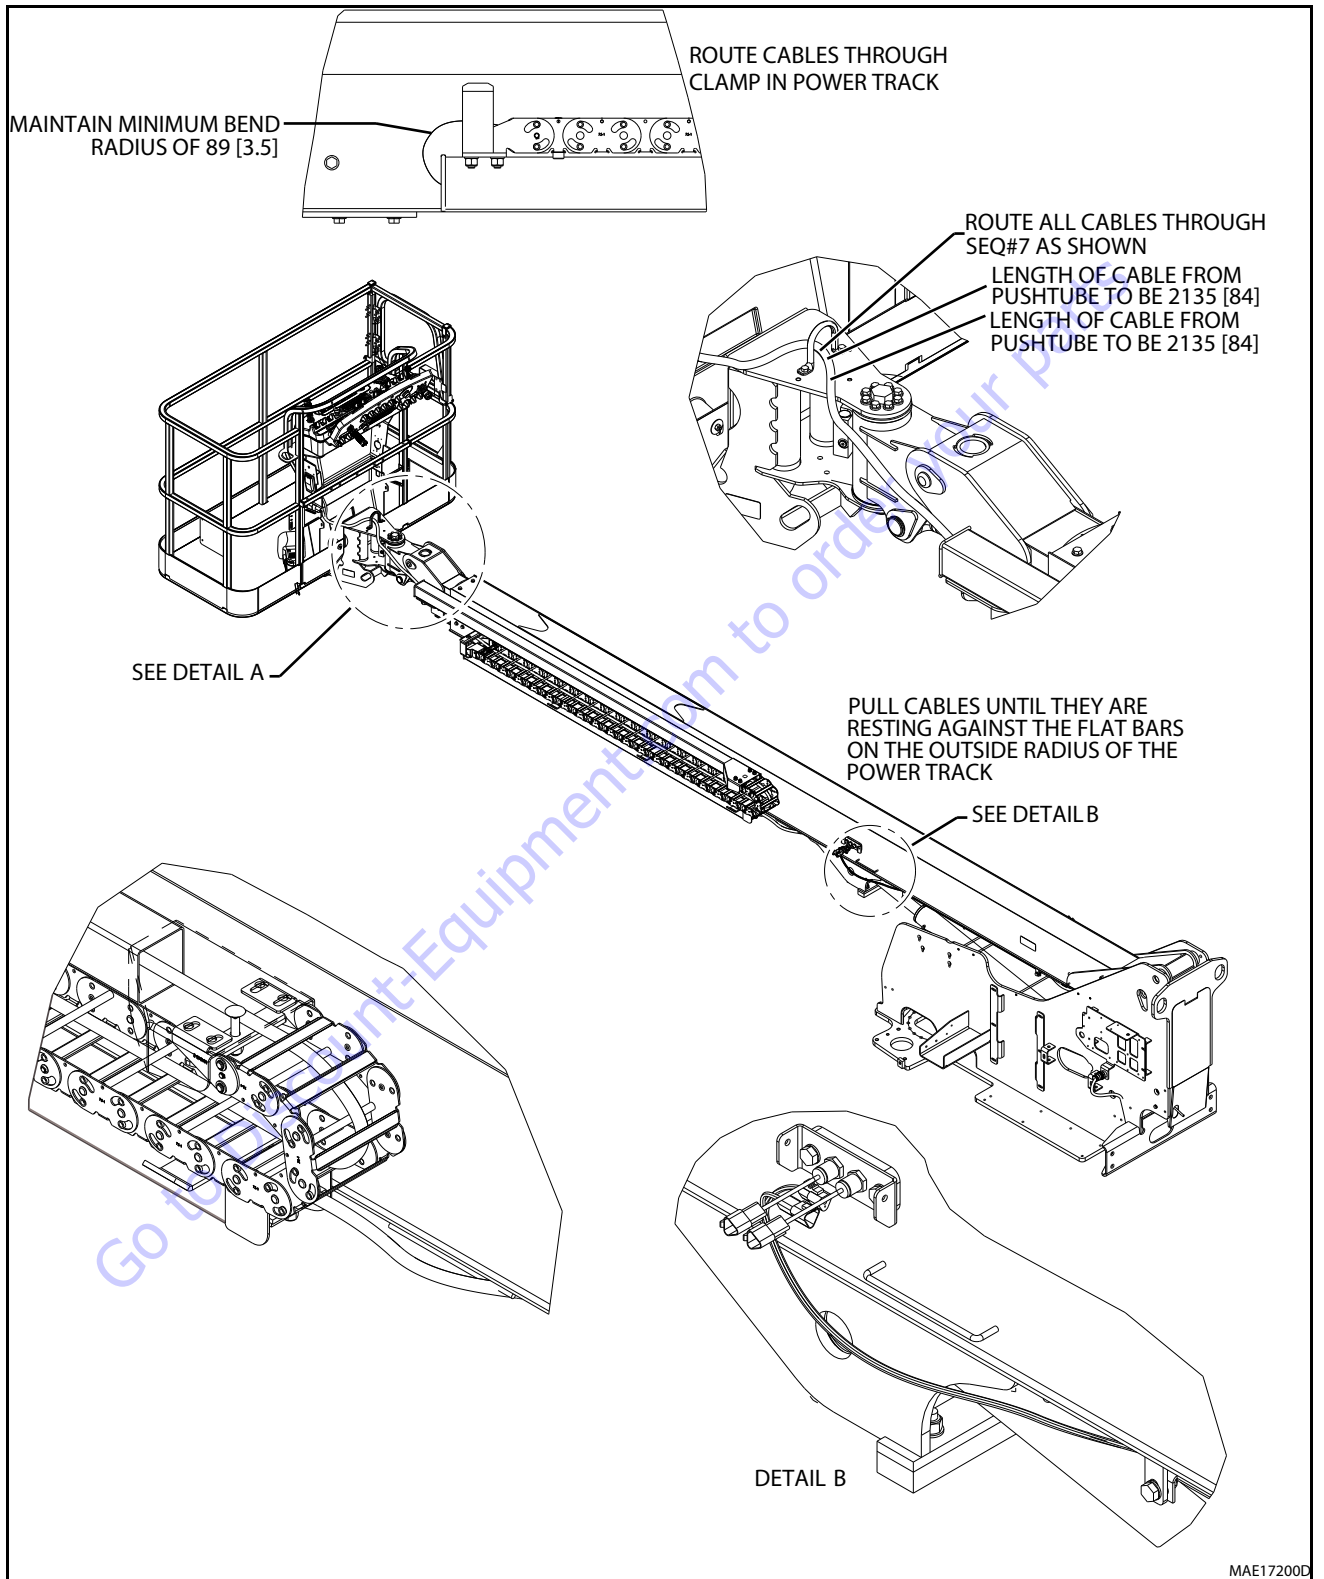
Cables and Clamps Installation - 400SC (Sheet 1 of 2)
